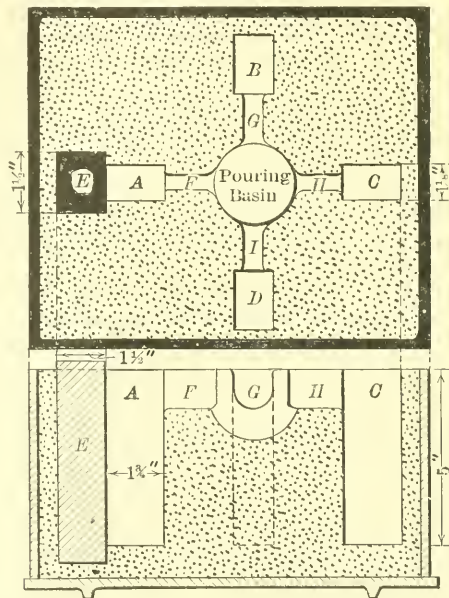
MOLD FOR TEST BARS THAT SOLVED INSIDE CHILL PROBLEM
